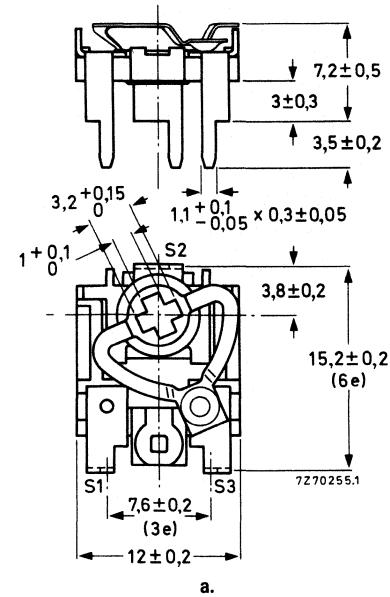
Test switch for horizontal mounting, with two active switch connections:
